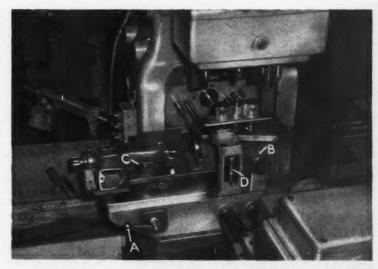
Close-up view of the fixture on the machine in Fig. 5, showing the wheeled pallet on which the casting is moved into the clamping position, and the valve lever A for the air-operated clamps
